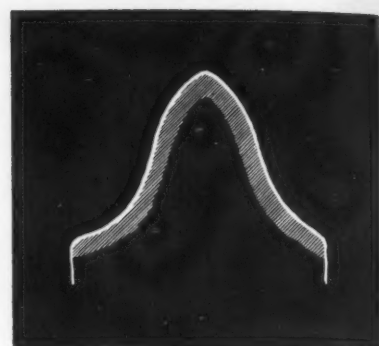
(Right) Depth and Extent of Hardened Surface Produced on Sprocket Tooth Using Manual or Mechanical Operation with Two Torches
